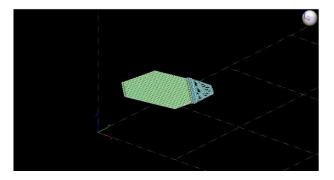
Isometric view of the -45° and bottom YXZ oriented piece depicting a specified layer that will print in a continuous tool path with no defects.
